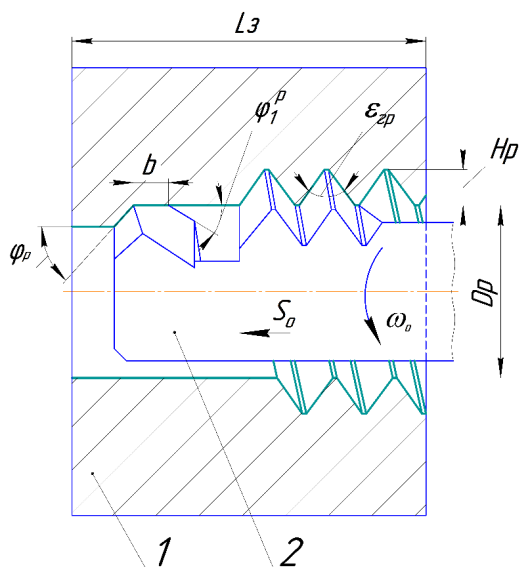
Diagram of internal threading with a combined tool with a comb cutter
